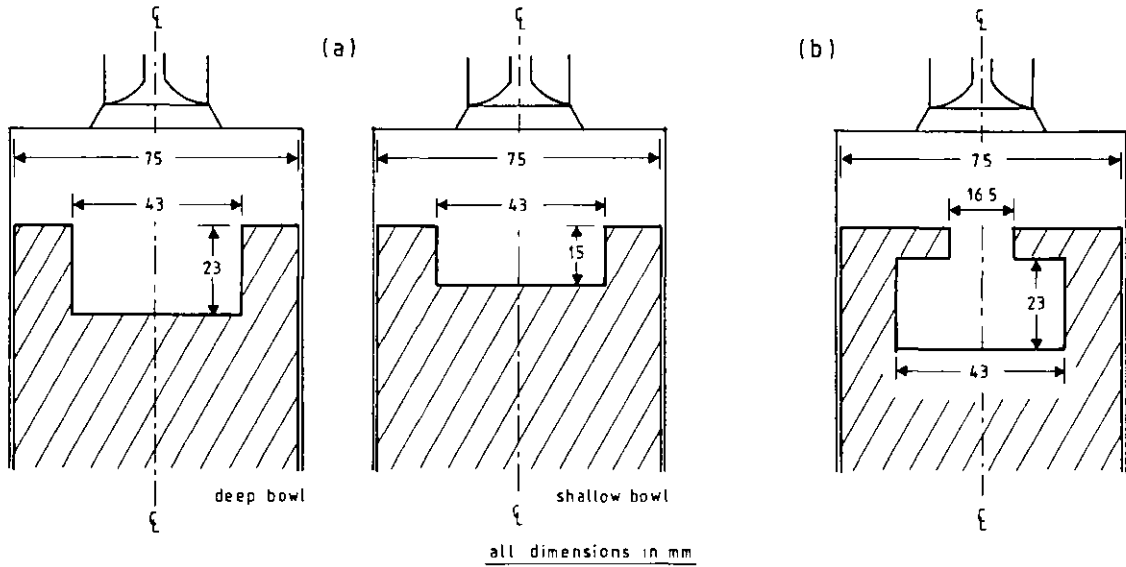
Piston bowl configurations used with CR = 3.5.
